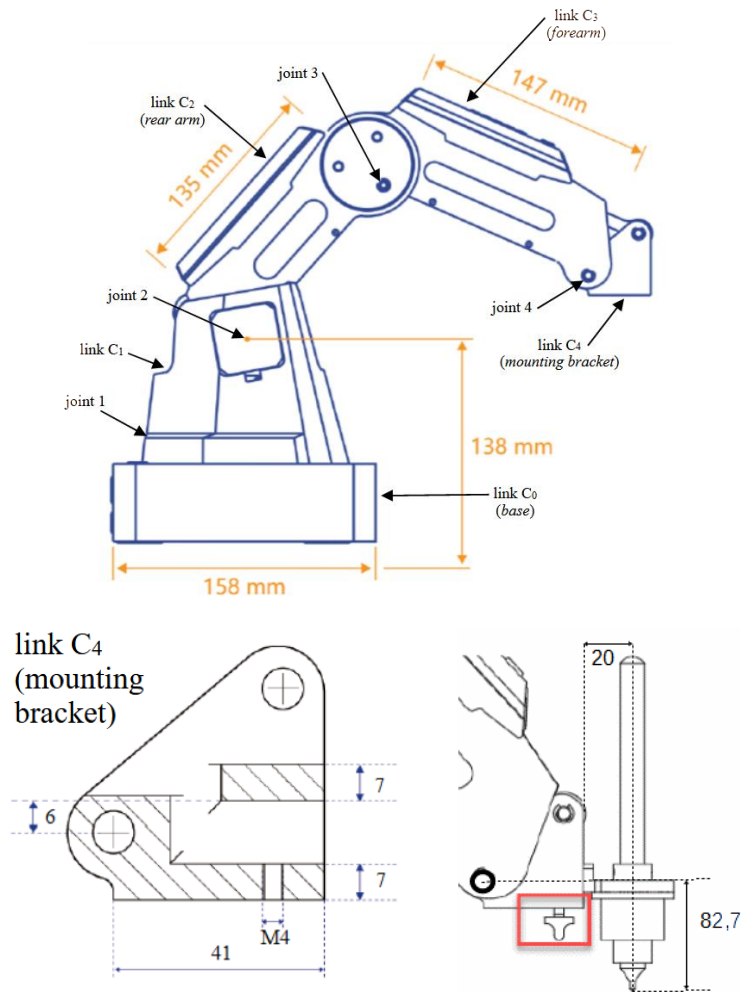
Dimensions of the links of the robot arm, the tool mounting bracket, the Pen tool.
